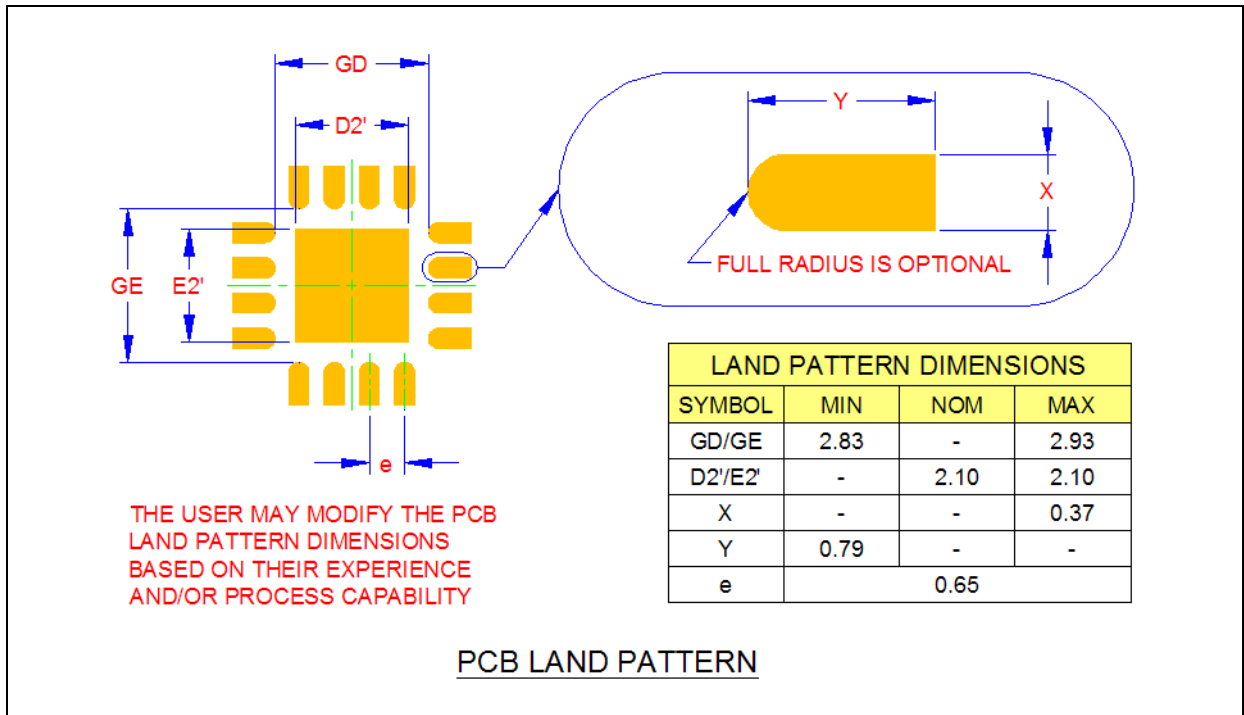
16-Pin QFN 4mm x 4mm PCB Footprint
